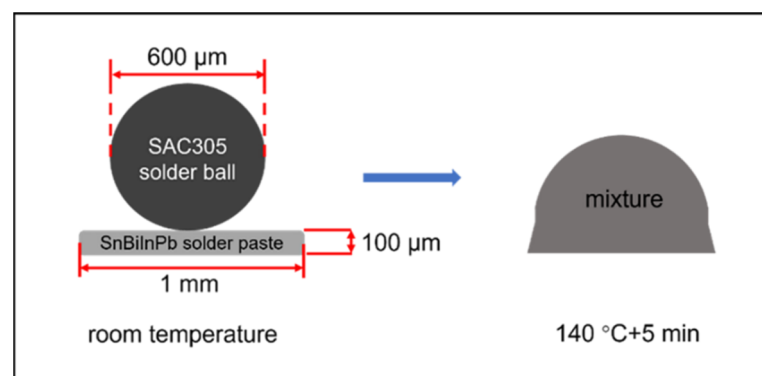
Schematic diagram of the assembly process using SAC305 solder balls and 13.5Sn–37.5Bi–45In–4Pb solder paste.
